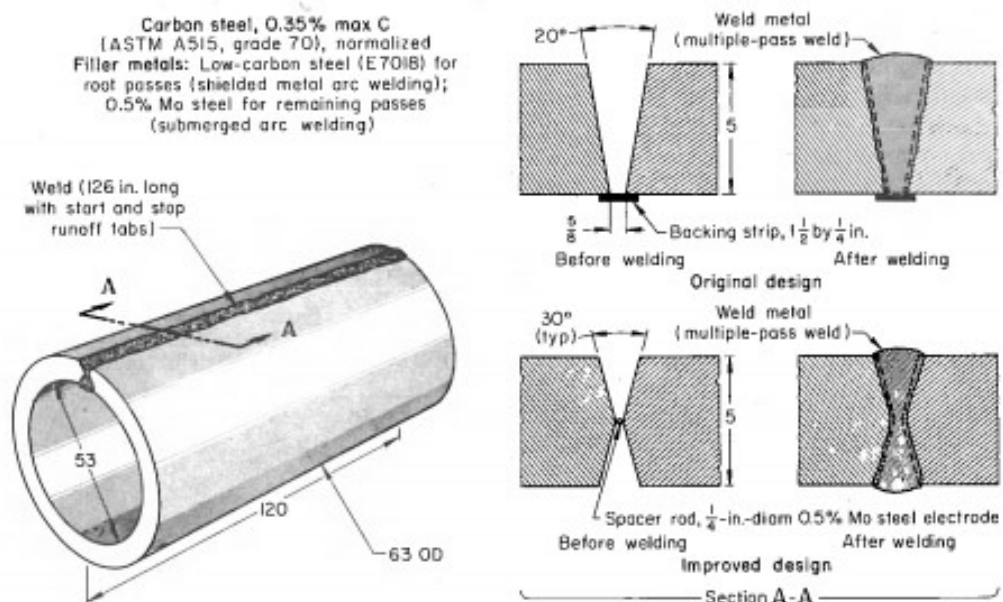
Submerged arc welding schematic for pipeline⁶⁶.
